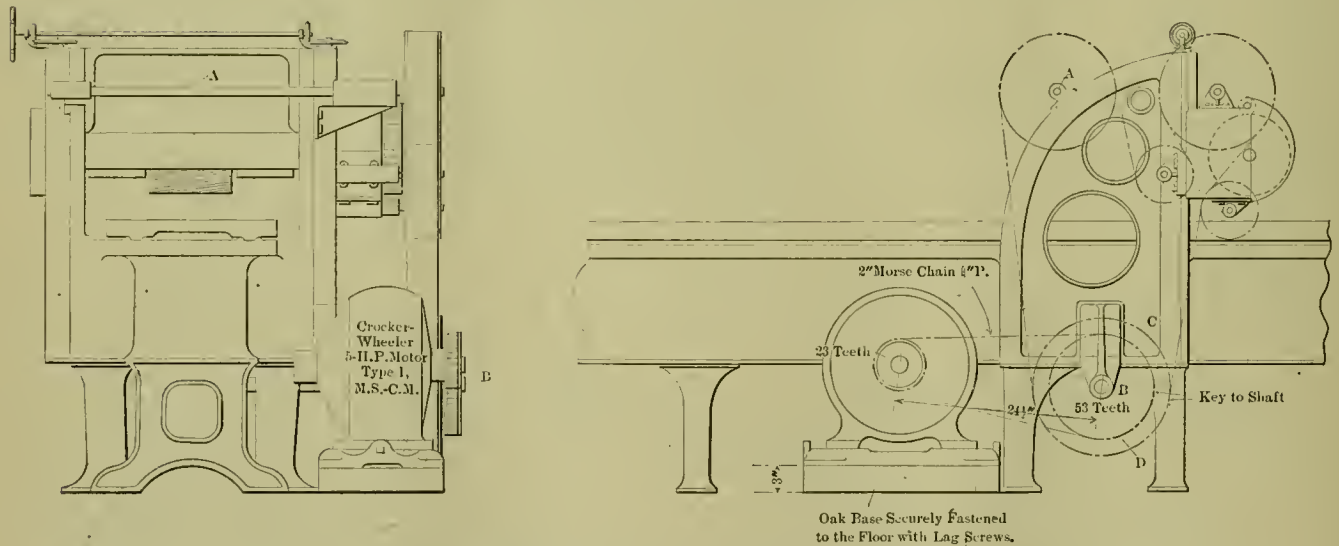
MOTOR DRIVE APPLIED TO SELLERS SLAB MILLER.
